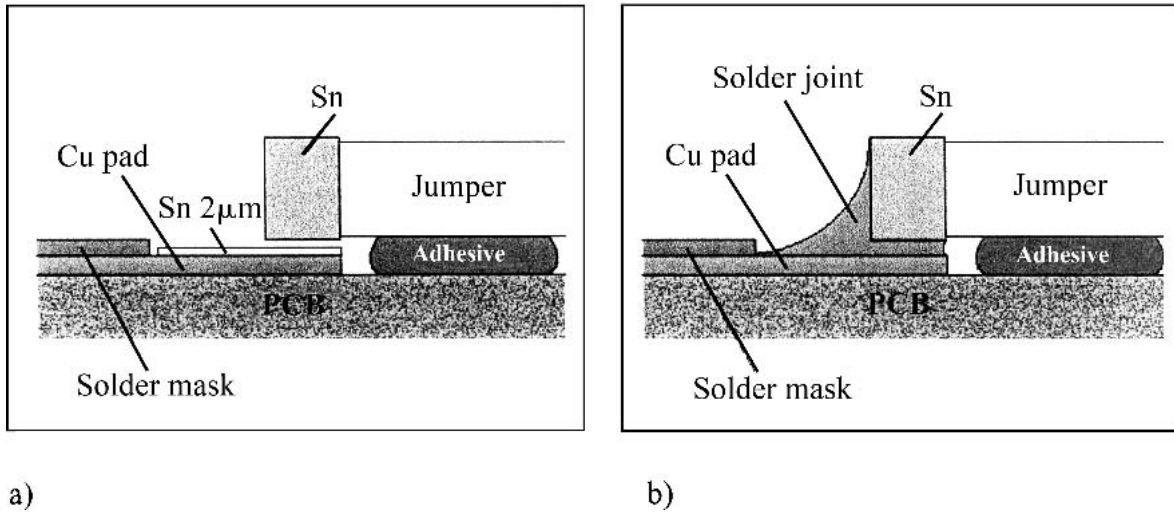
Cross section of a solder joint: (a) before soldering and (b) after soldering
